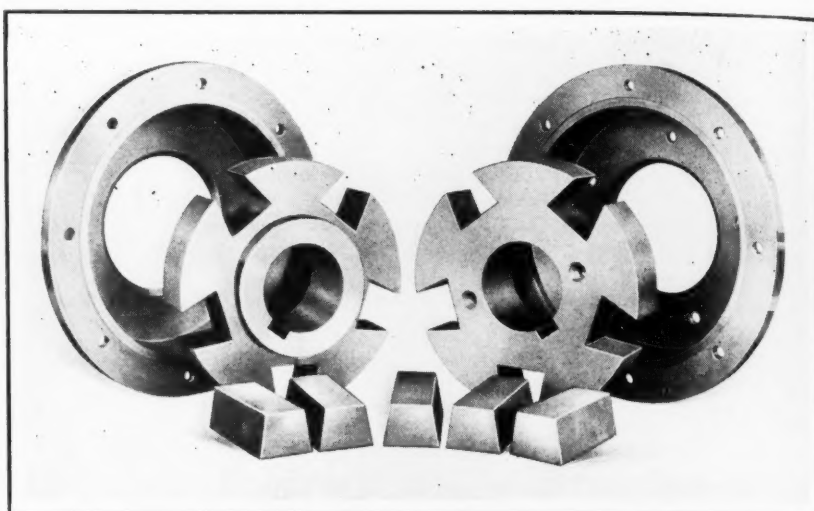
Disassembled View of Nicholson Flexible Coupling
